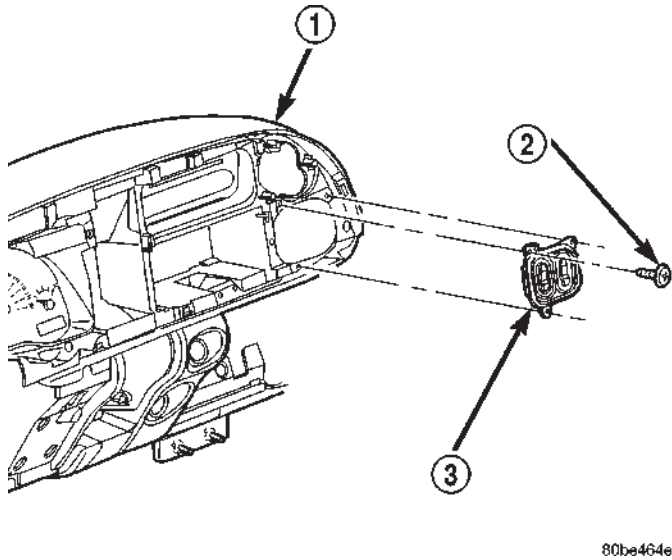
Heated Seat Switch and Bezel Remove/Install
